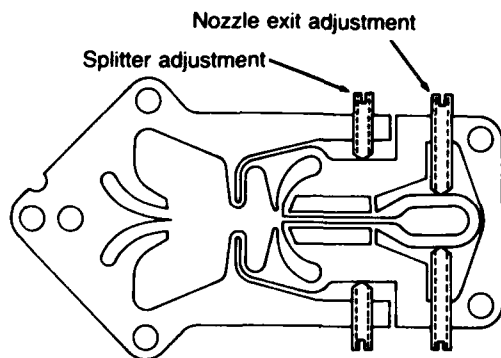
Cross-sectional view of LJARS with mechanical adjustments to reduce null offset.
